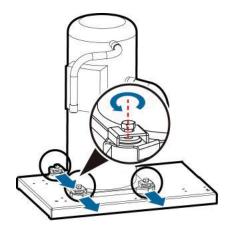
Schematic diagram for the removal of the compressor footer holder
